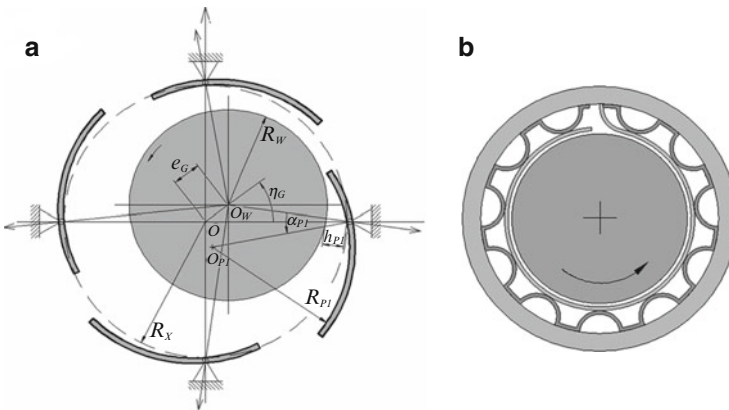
Variable-geometry bearings selected for the investigation (a) – tilting pad bearing, (b) – bump foil bearing)
